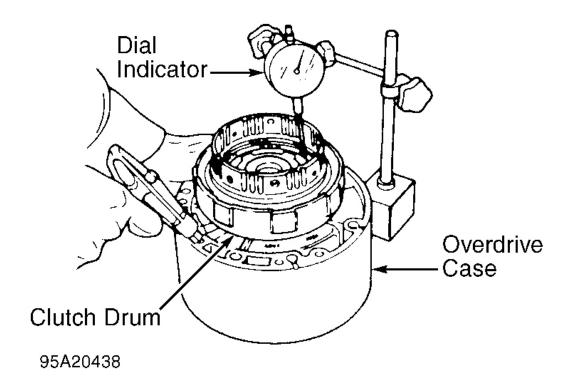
Measuring Forward Clutch Clearance Courtesy of ISUZU MOTOR CO.
